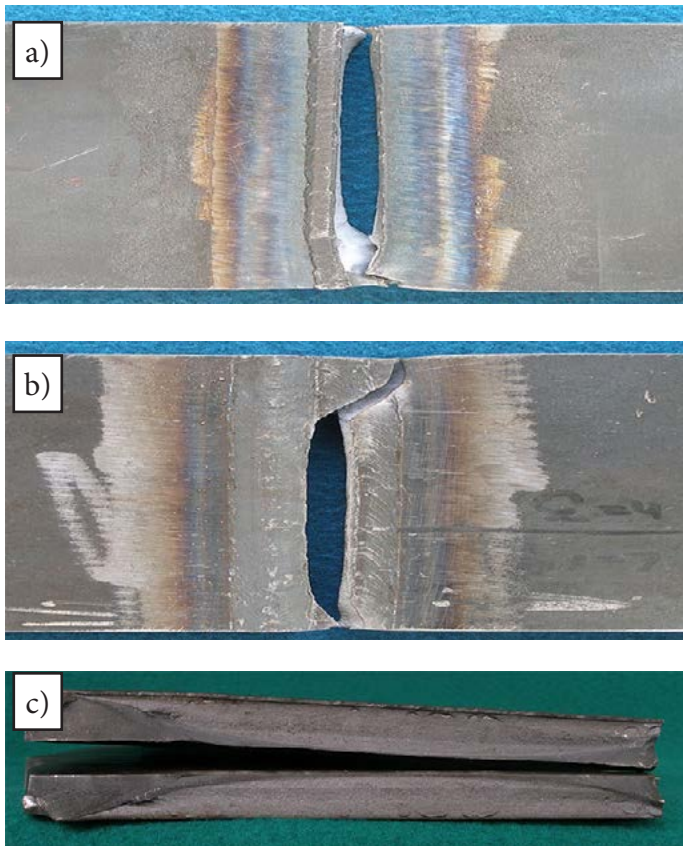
Exemplary fatigue fracture initiation in the interface between the butt weld root and the base material (specimen no. 3 of series I): a) view from the root side, b) view from the face side, c) fatigue fracture
